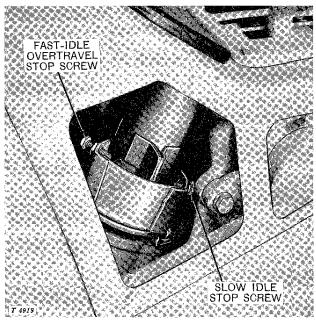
Speed Control Stop Screws (-29000)
